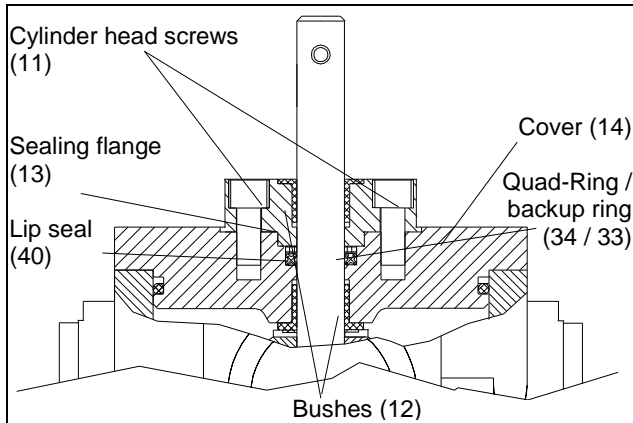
Preparing to replace the Quad-Ring / backup ring or lip seal
